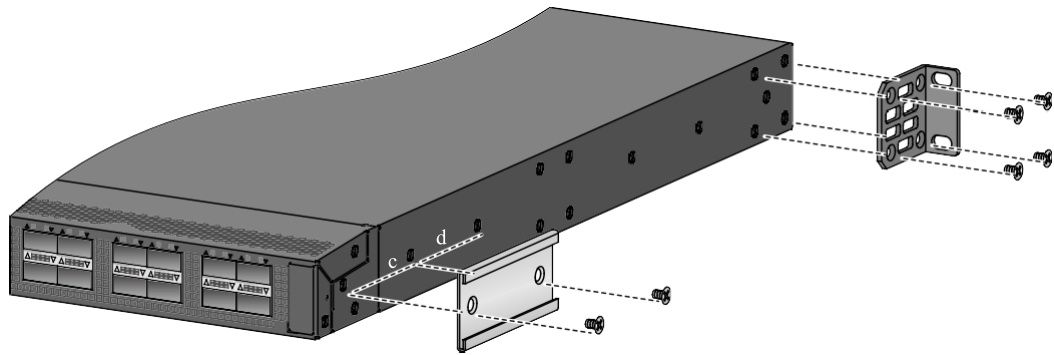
Attaching the mounting brackets and chassis rails to the SDC 5850-2S-32H switch (power module-side mounting position for the mounting brackets)
